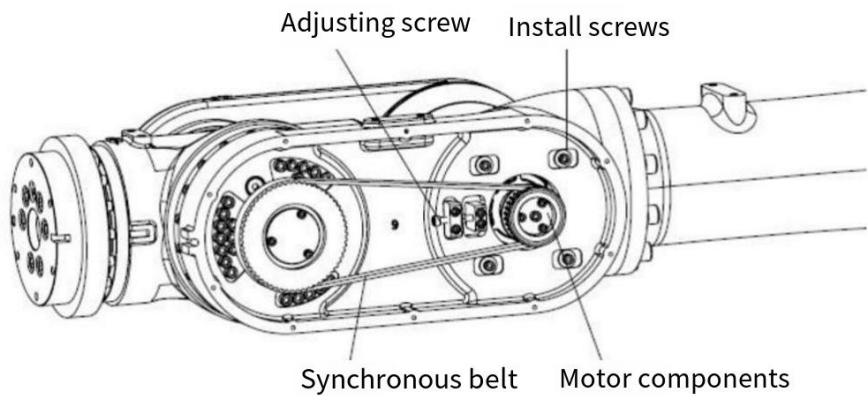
RX3-A680-2260/RX3-A680-2560 Disassembly of Synchronous Belt
